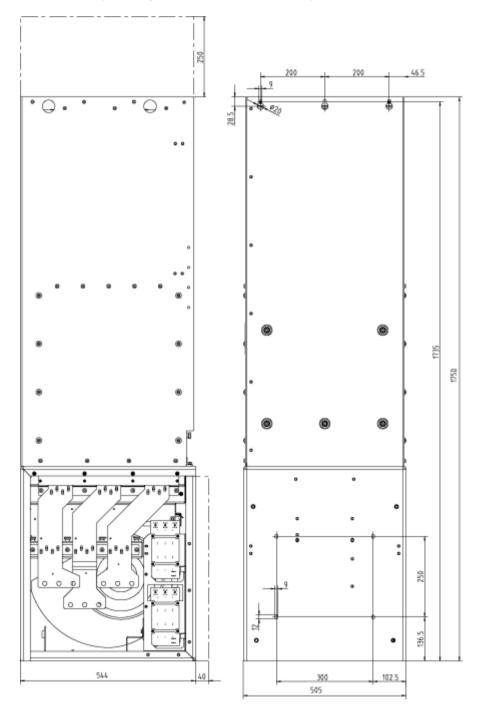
Dimension drawing for Active Interface Module, frame size JI Side view, rear view
